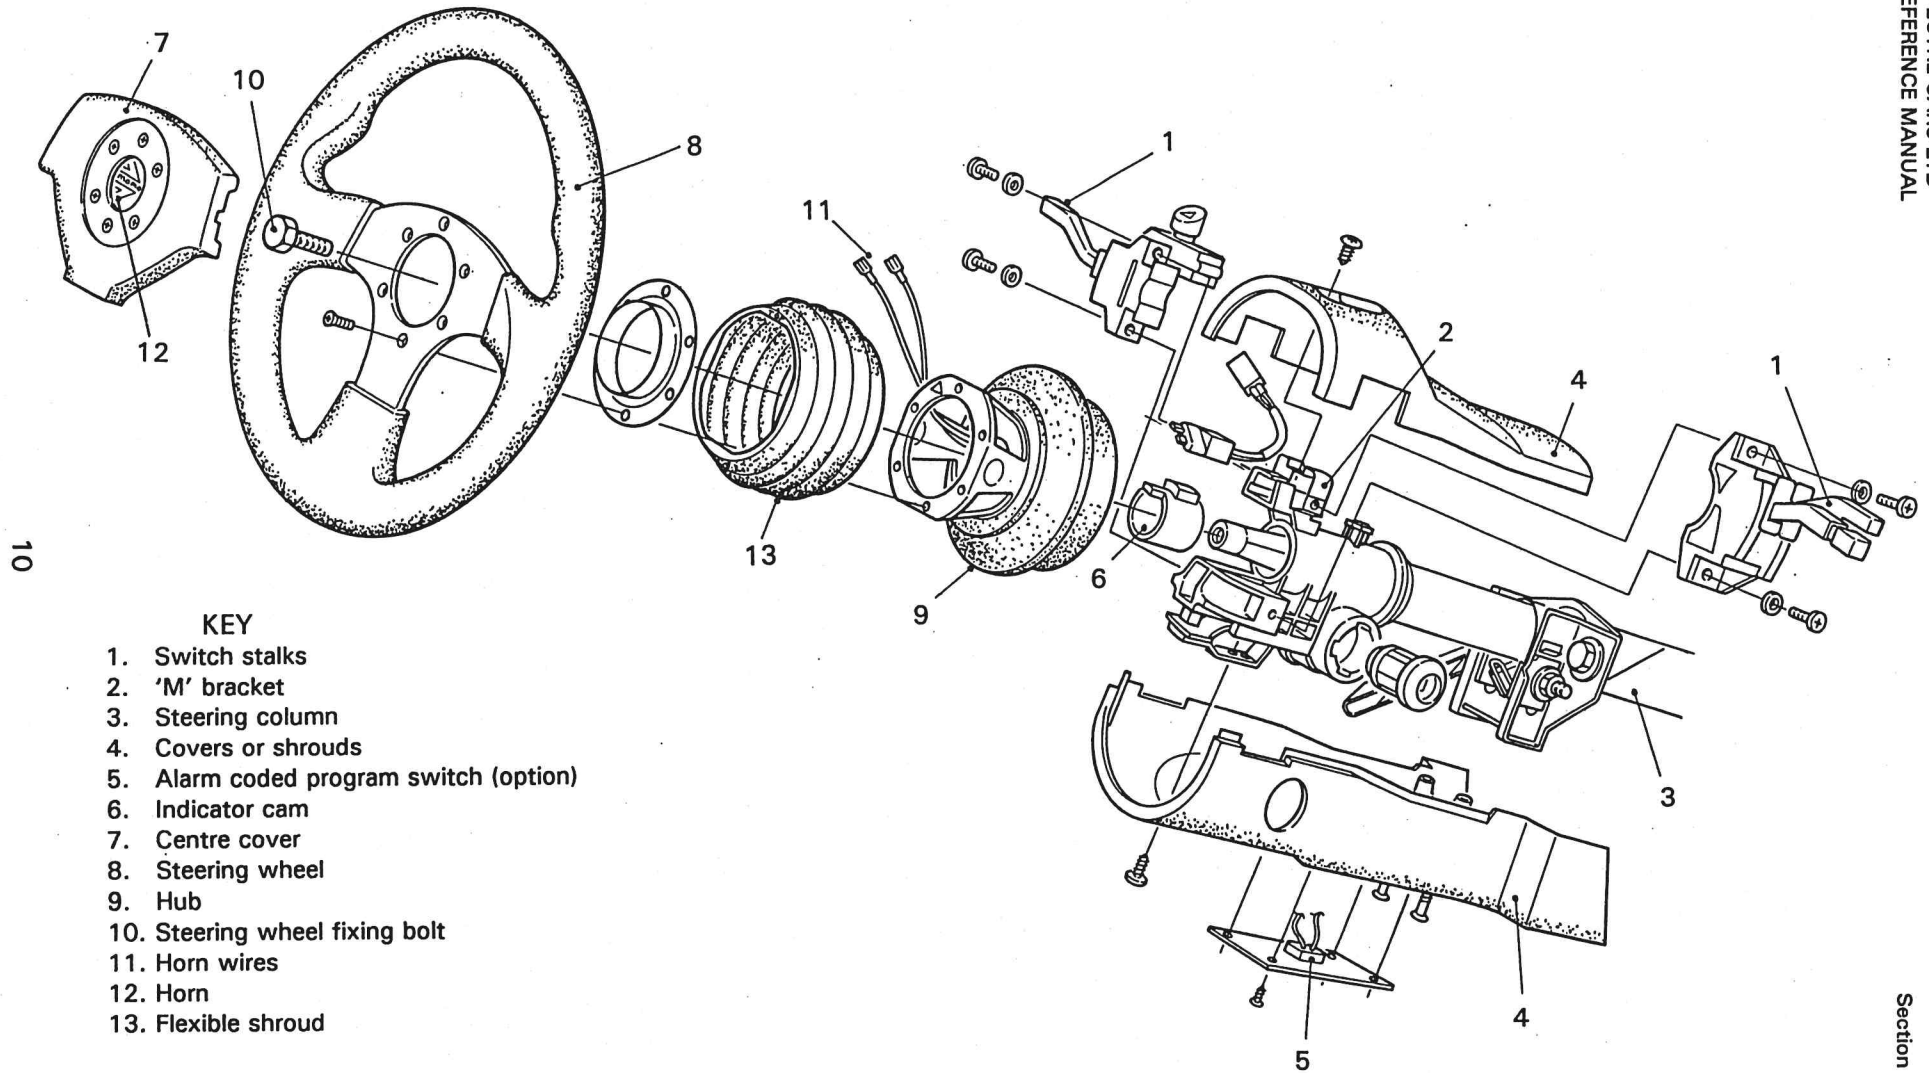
Steering Wheel and Switch Stalk Assembly to Steering Column
